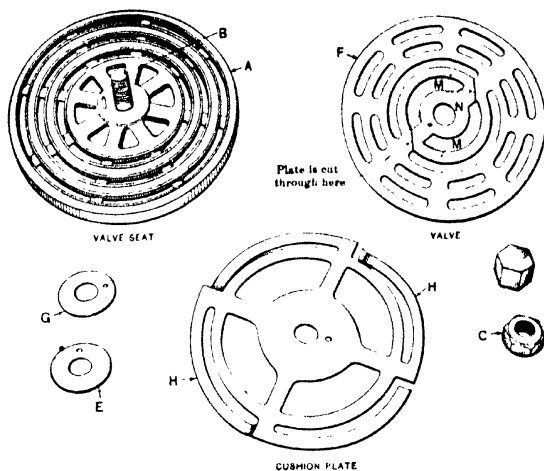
Parts of the Ingersoll Rand Plate Valve.
